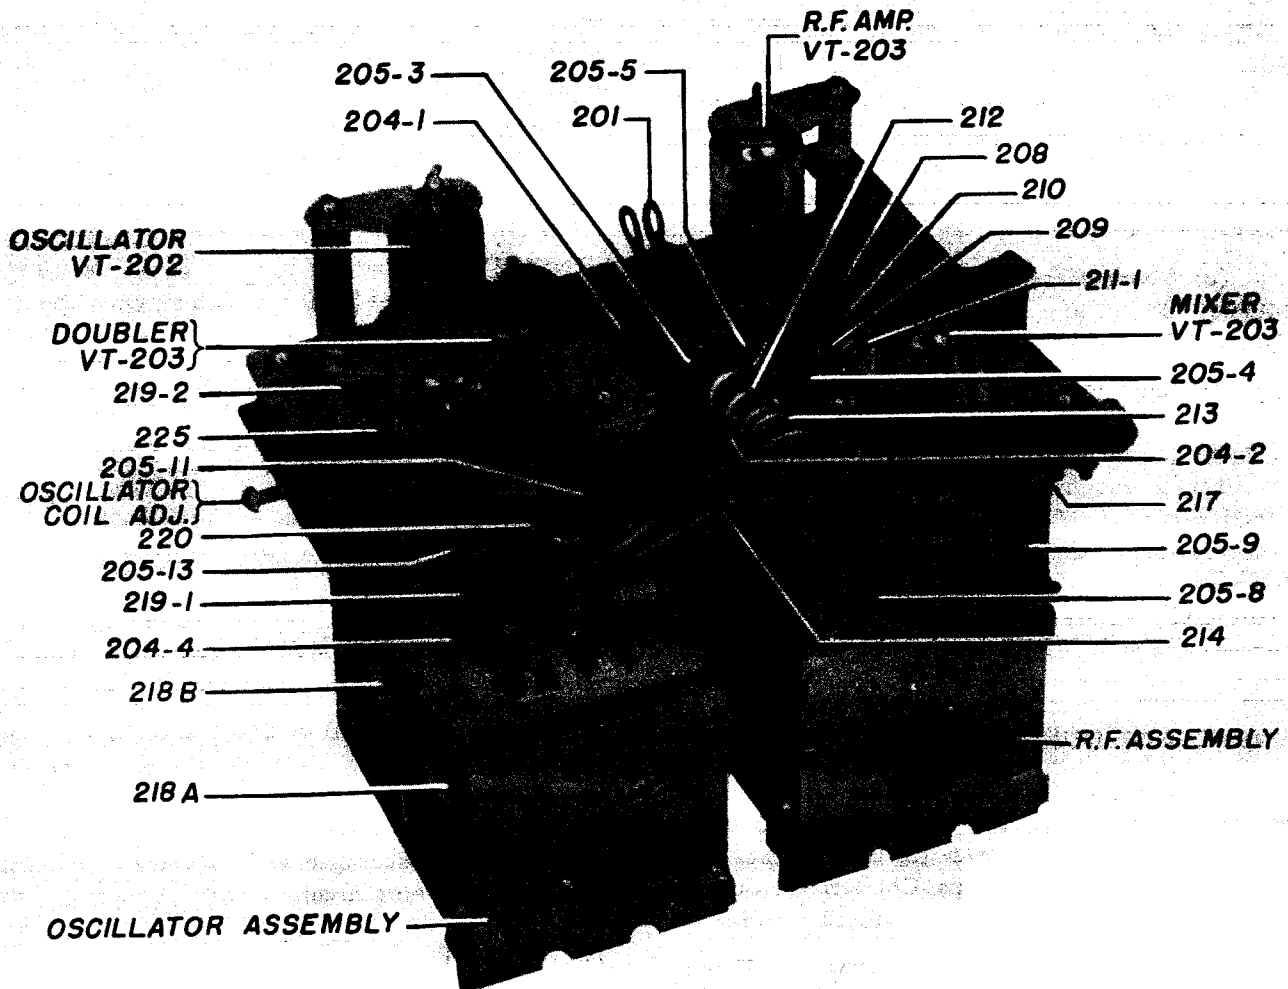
Radio Receiver BC-639-A, Top Rear Oblique, R. F. and Oscillator Assembly
